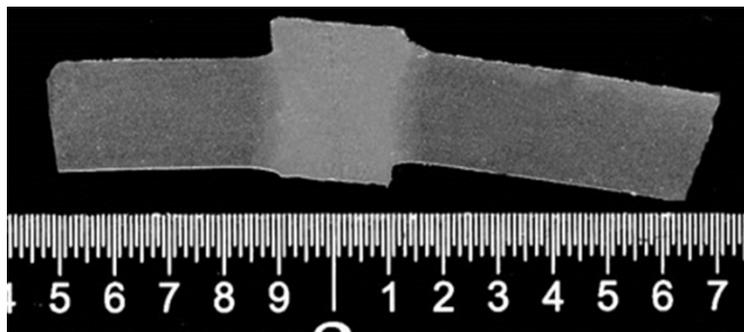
Typical Flash Welded Seam Cross Section, ca. 1946
